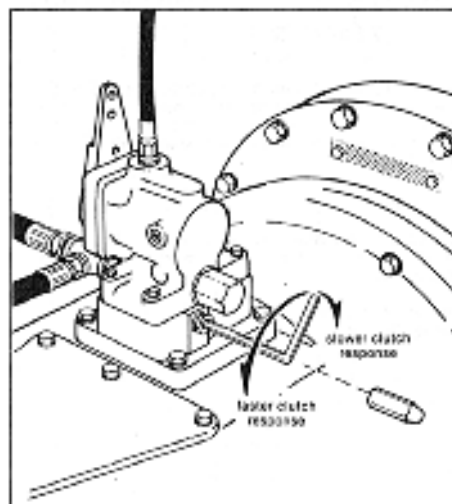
Clutch Cylinder Timing Adjustment; used to regulate shifting time.
